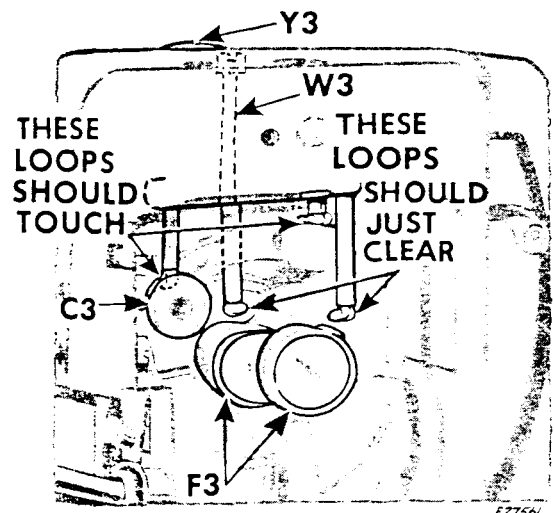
Wick Loops for Needle Bar Link and Thread Take-up
